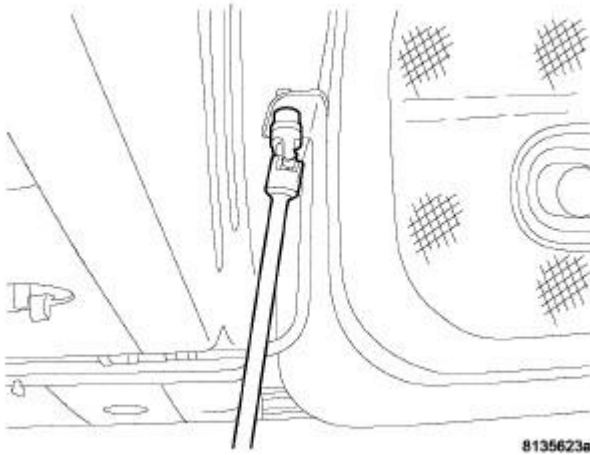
Fuel Tank Support Strap Retaining Bolts
